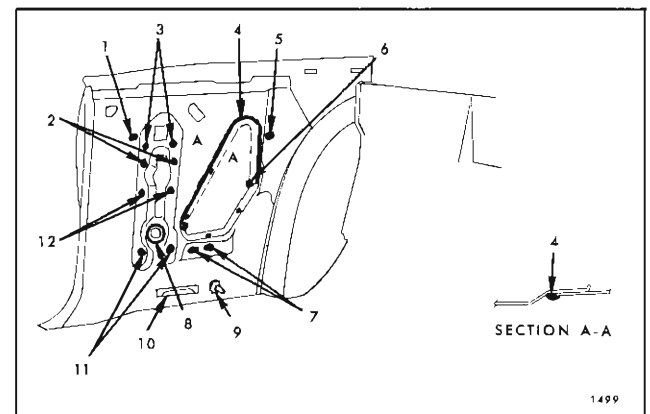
E16—Rear Quarter Inner Panel Sealing "67" Styles
